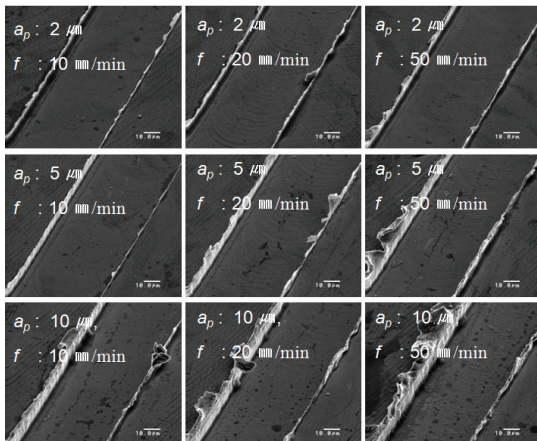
The machined surface using a Ø 50 µm end-mill with various cutting conditions
